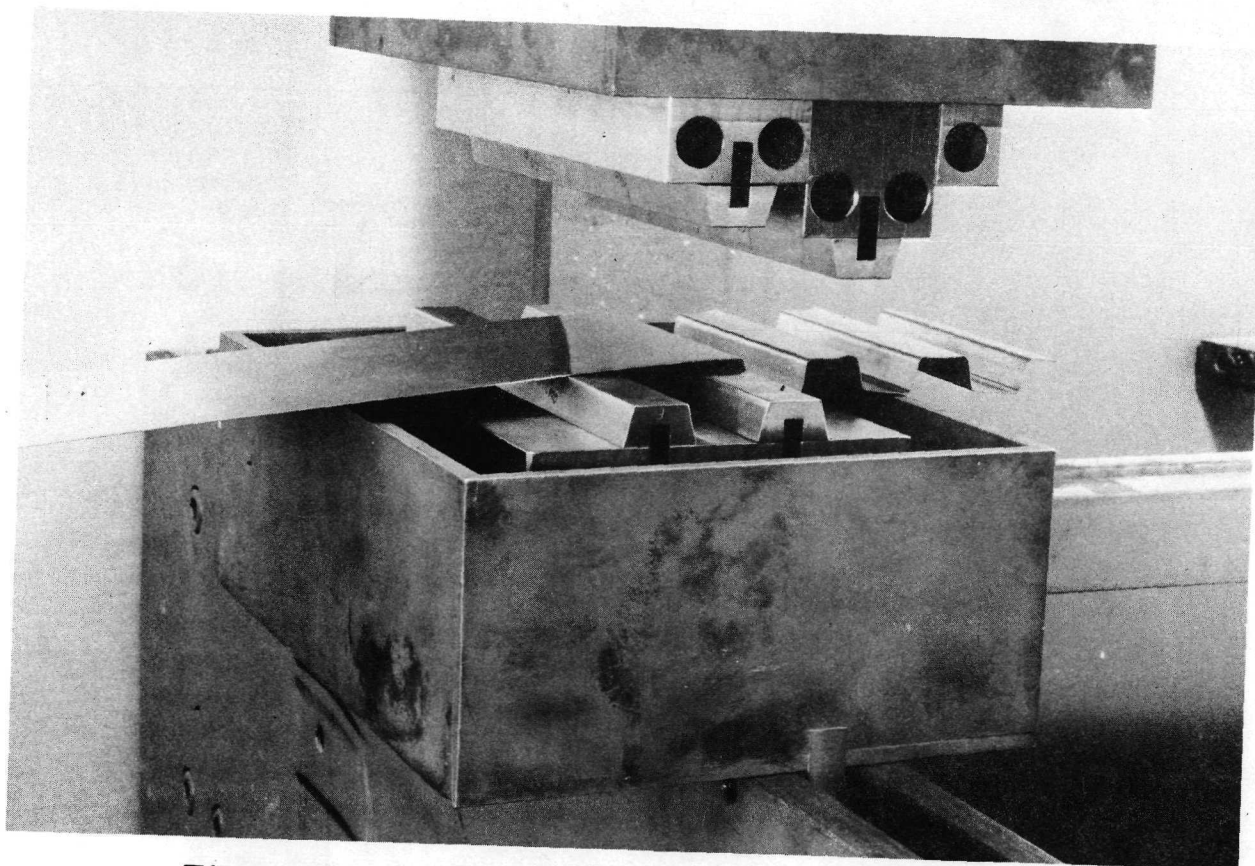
Corrugation Die Mounted in Press Brake Neg. 122573B
